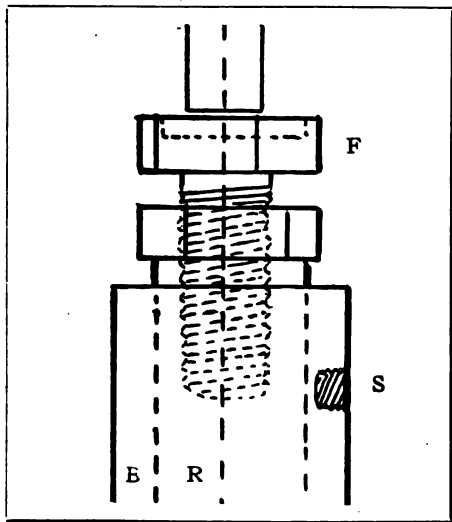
Upper part of valve pushrod showing manner of adjustment
